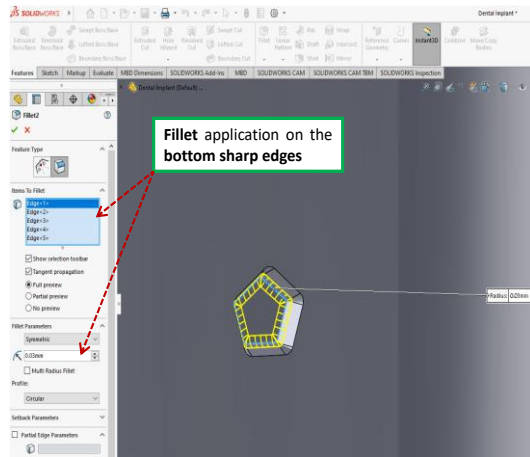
Fillet application to smooth the lower edges of the pentagonal solid model
